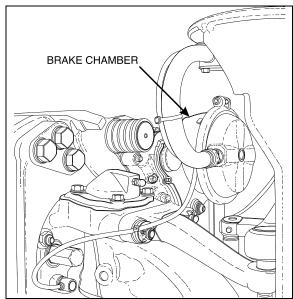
FRONT WHEEL BRAKE AIR CHAMBER 12158
